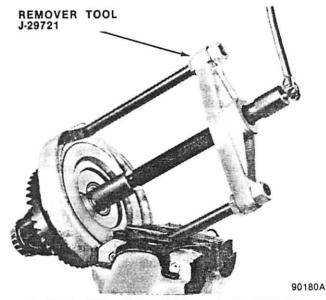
F-51 Differential Bearing Removal-Model 60 Axie
